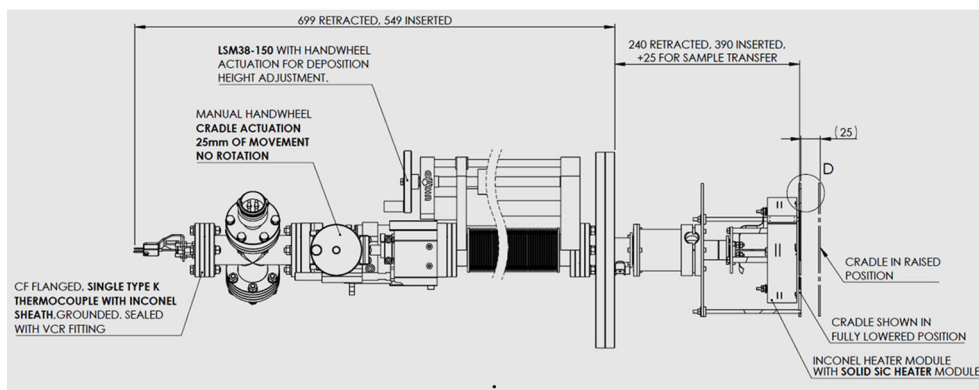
Drawing of the heater used in the wafer system. Figure modified from the approved drawing provided by UHV Design Ltd.
